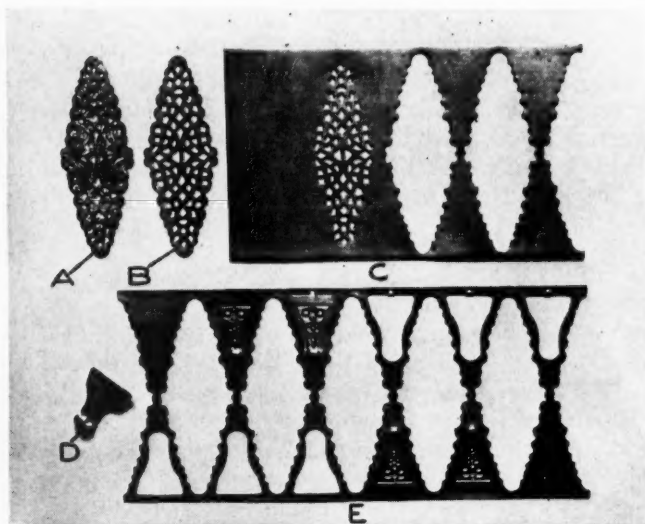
Ornamental Parts and Scrap Stock from which Parts were Blanked by Dies Shown in Figs. 3 and 4
